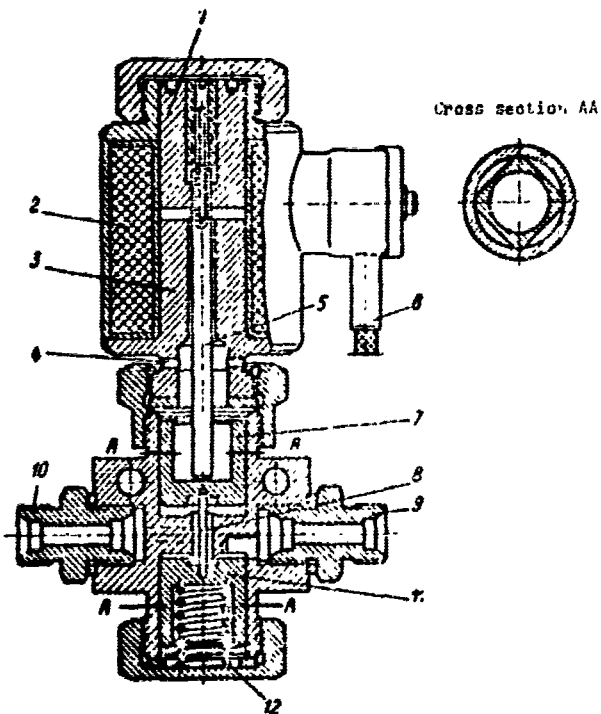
Electromagnetic pneumatic control valve. 1) coil; 2) plunger; 3) electrical contact; 4) valve; 5) main spring; 6) diaphragm; 7) valve seat; 8) valve; 9) diaphragm; 10) valve; 11) valve; 12) valve seat.
